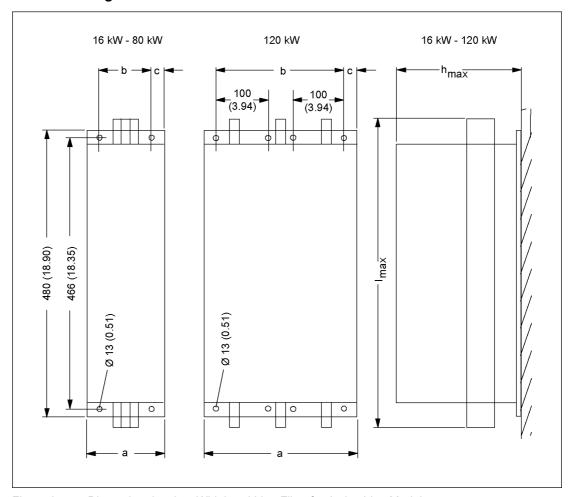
Dimension drawing: Wideband Line Filter for Active Line Modules
